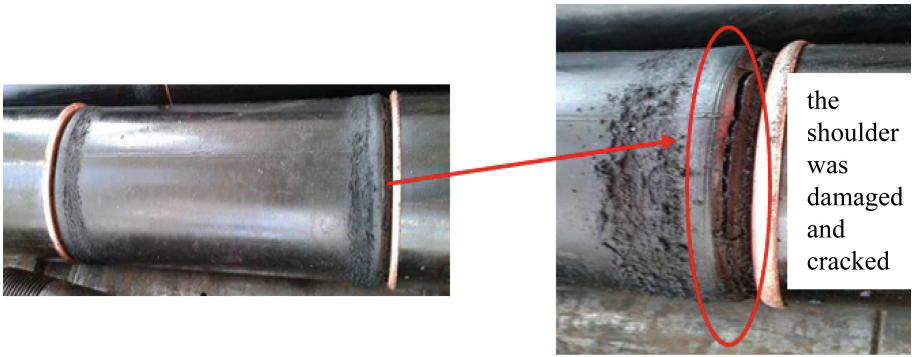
Packing element was damaged and cracked under 80 MPa at 120 °C after oil immersion test
